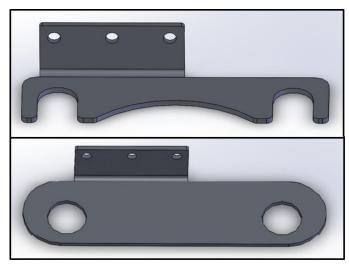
Bracket design for smaller DN-size with forks at the top and for larger sizes the design with bolt holes at the bottom.
